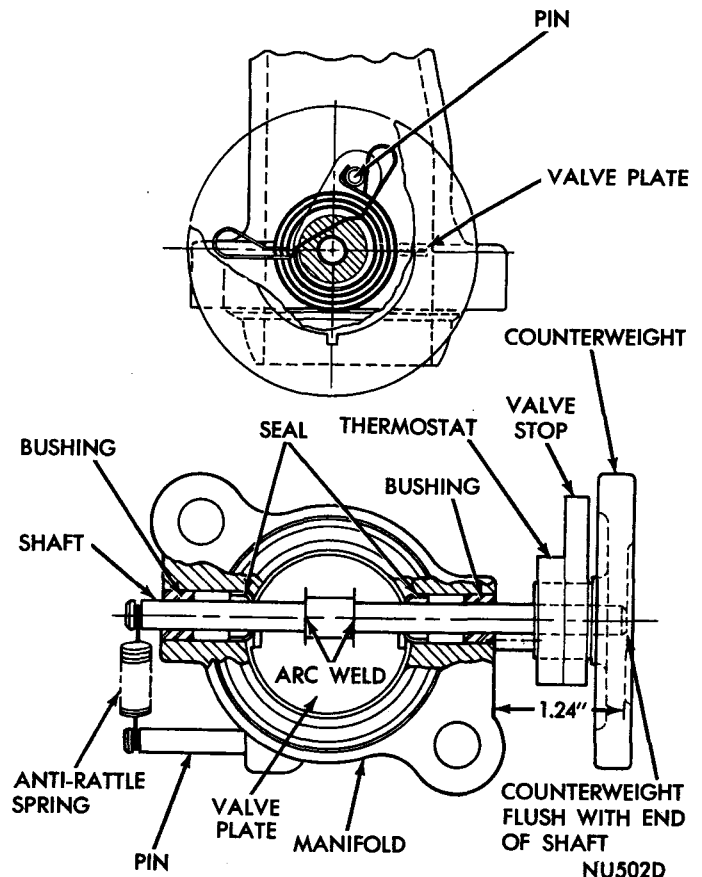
Proper Manifold Heat Control Valve Installation (318 and 360 Cubic Inch Engines)
